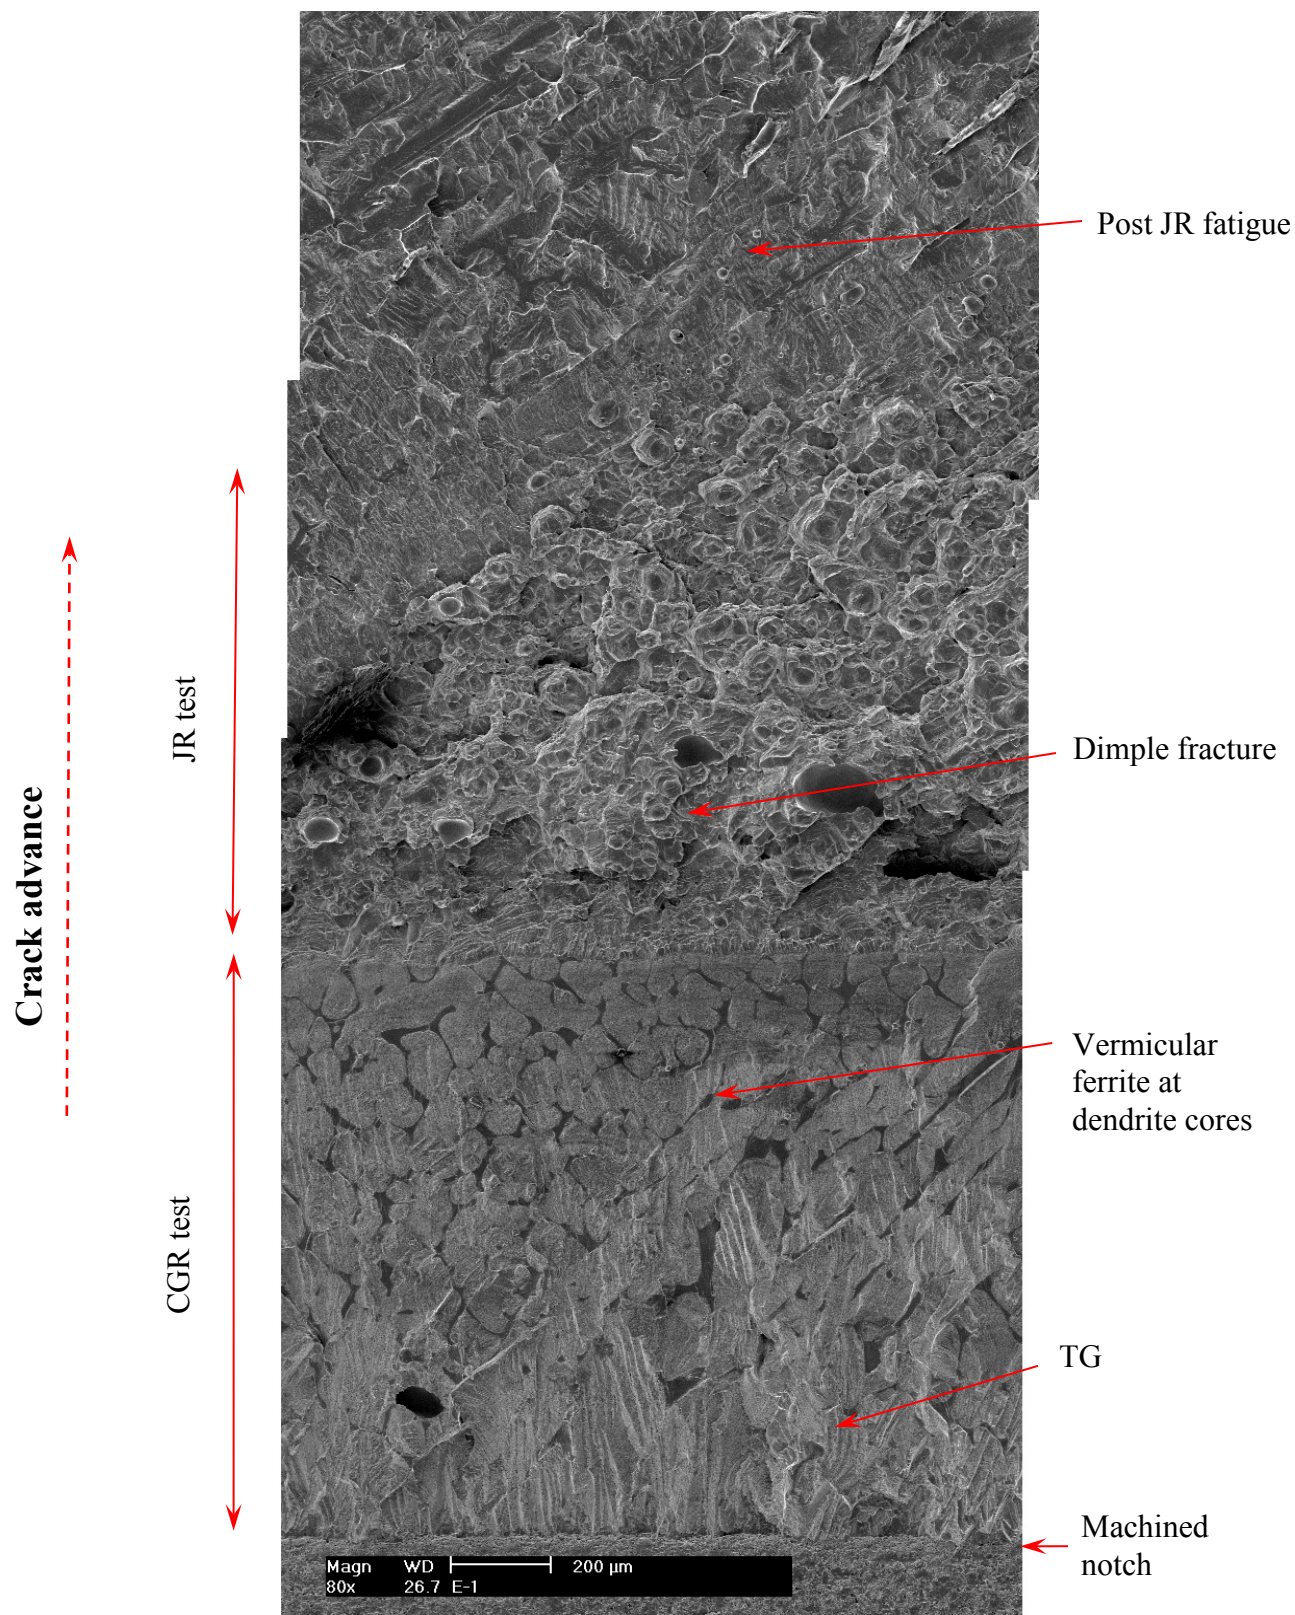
Fracture surface of specimen E-1 along the sample central line.
